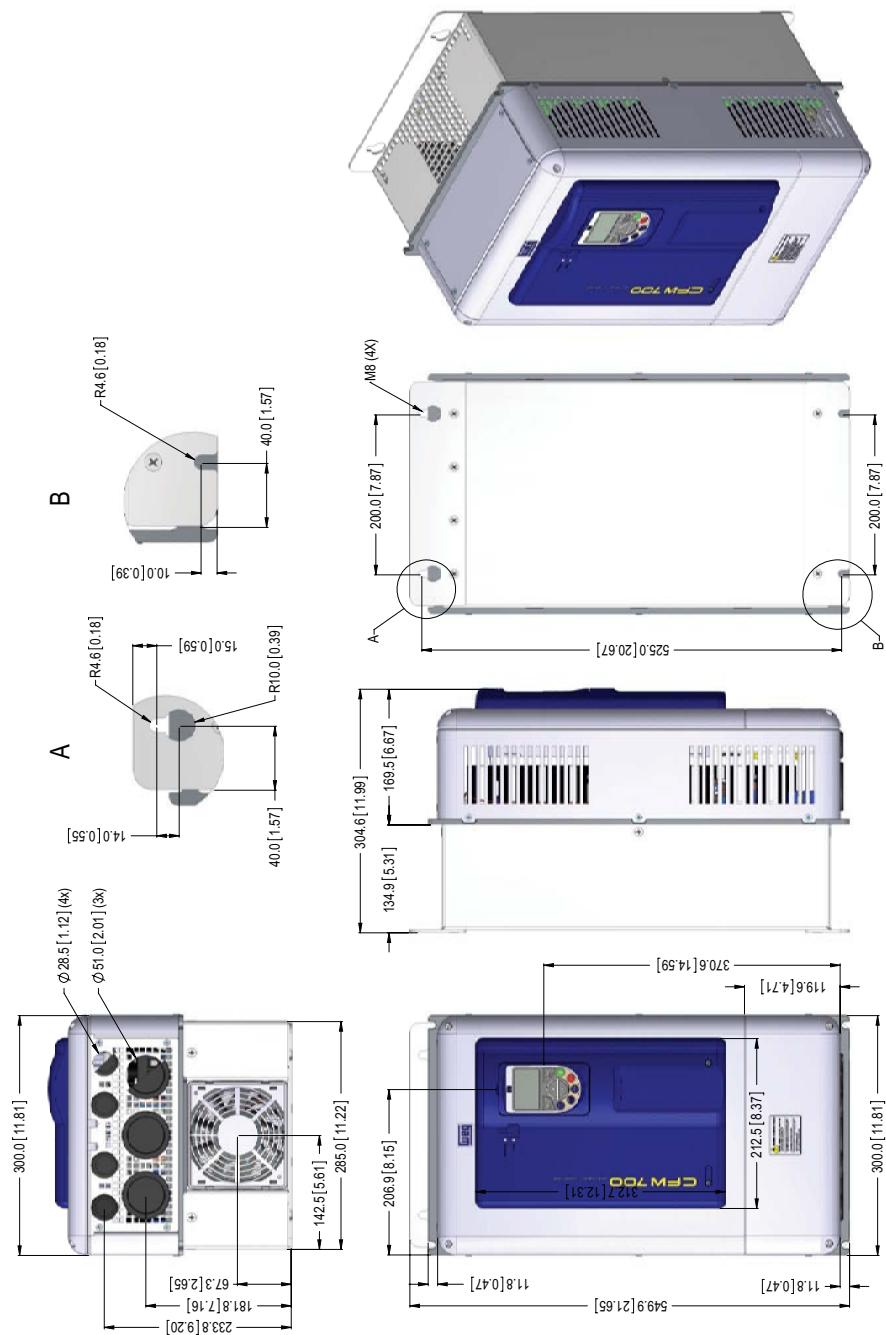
Inverter dimensions in mm [in] - frame B
